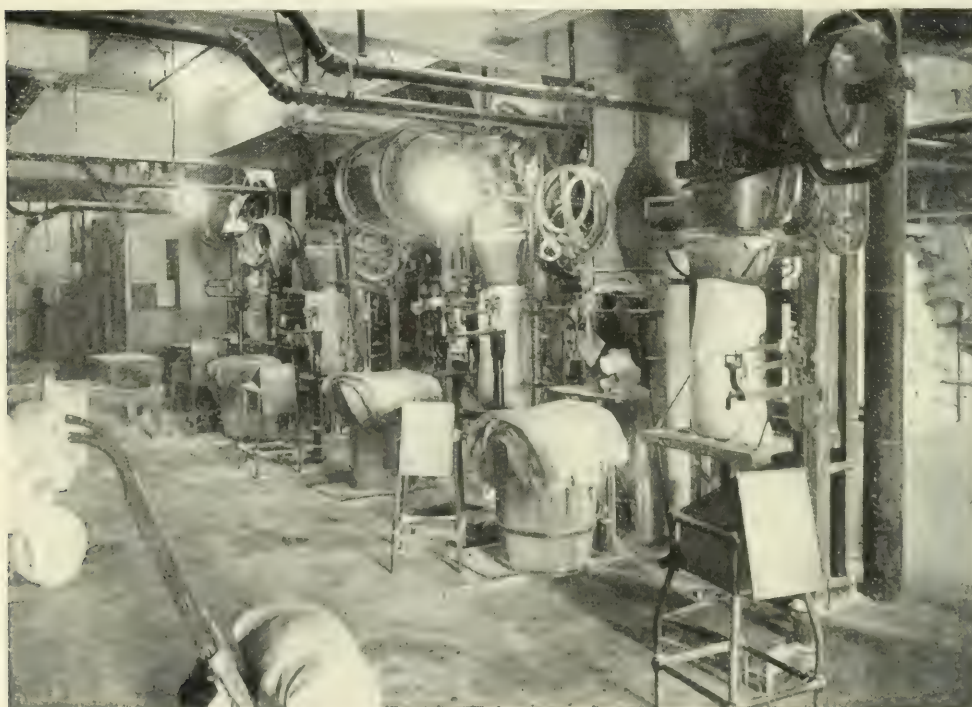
Day view indicating the character of lighting often employed at the bagging and weighing machines in the flour mill, a few 25-watt bare lamps are haphazardly placed and pulled over to some chosen position by a piece of string.
